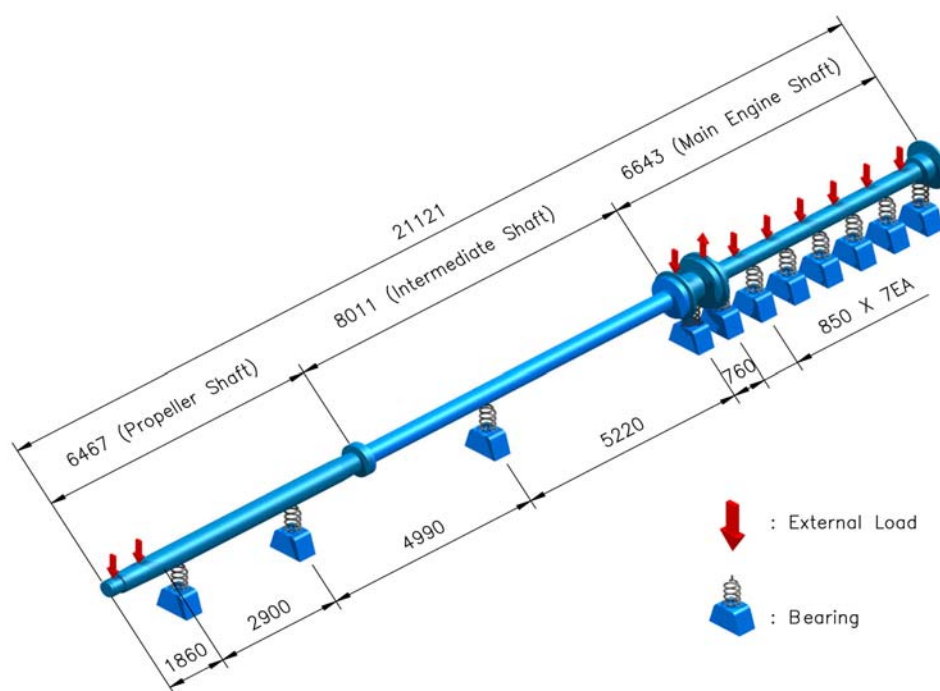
Modeling of shafting system for shafting alignment calculation(d)
